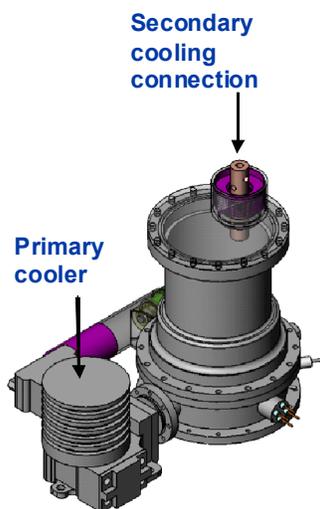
CAD drawing of GeMini showing both the primary and secondary cooling interface.
